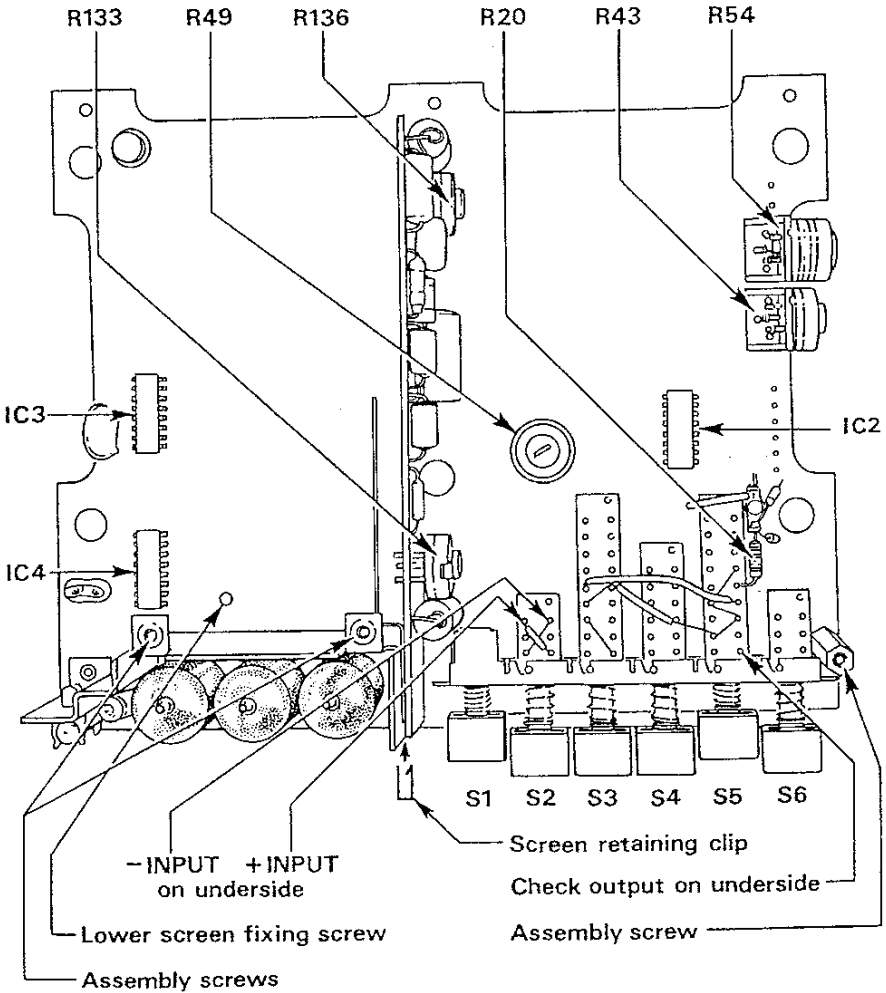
DISPLAY ASSEMBLY COMPONENT LOCATION
